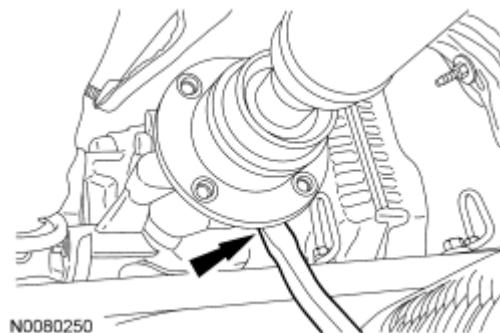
Separating Driveshaft Flange From PTU Flange Using A Suitable Pry Bar
